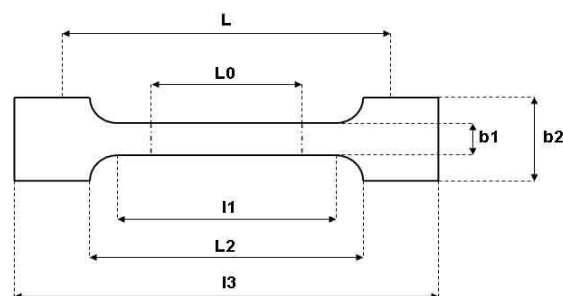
Dimensions of Test Specimens for Tensile Tests According to ISO 3167 Standards
